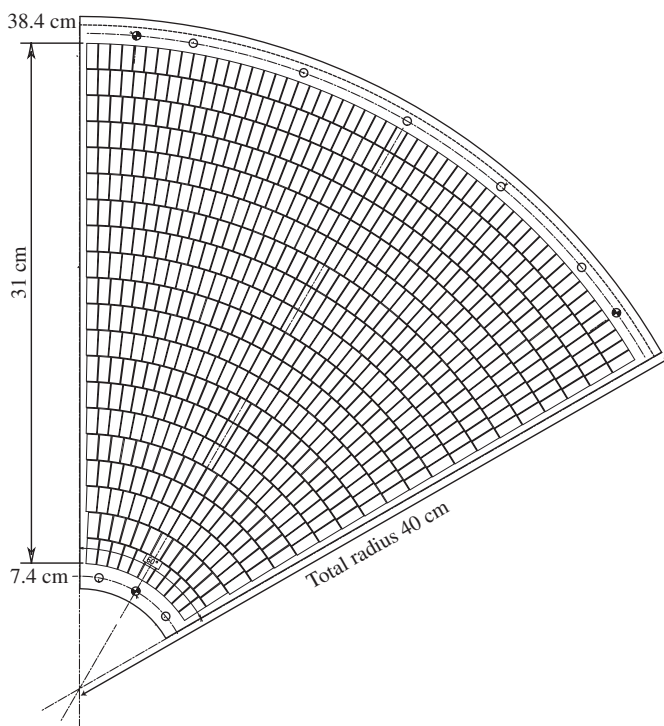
Mechanical drawing of a sector of the TPC, the layout of the pads is indicated.
